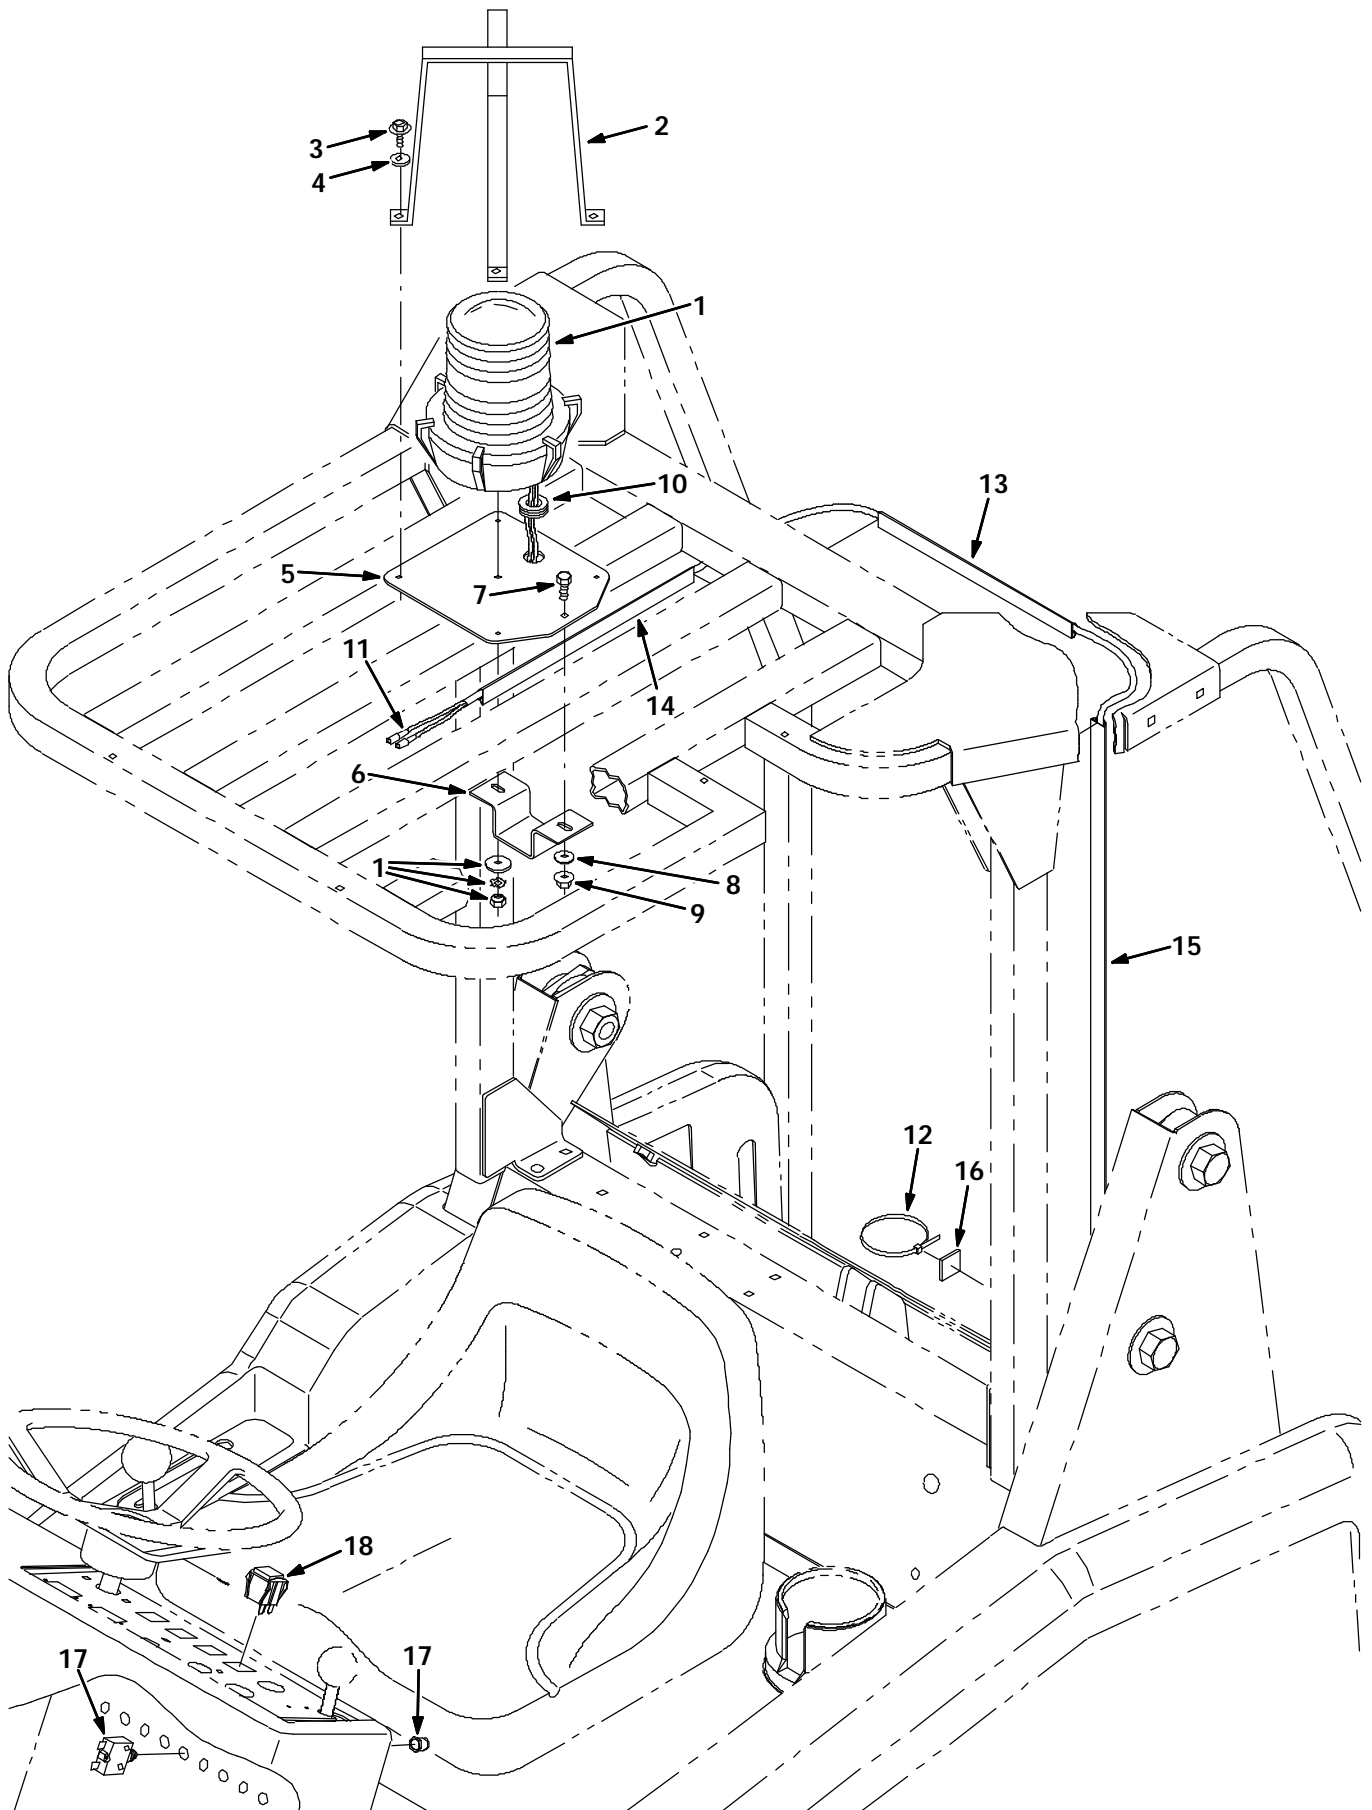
FLASHING LIGHT KIT 384123 INSTALLATION
